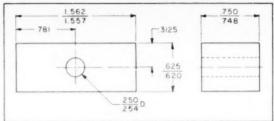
The limiting dimensions shown in Fig. 4 can also be expressed as indicated here. The dimension lines should not pass through dimension figures.
